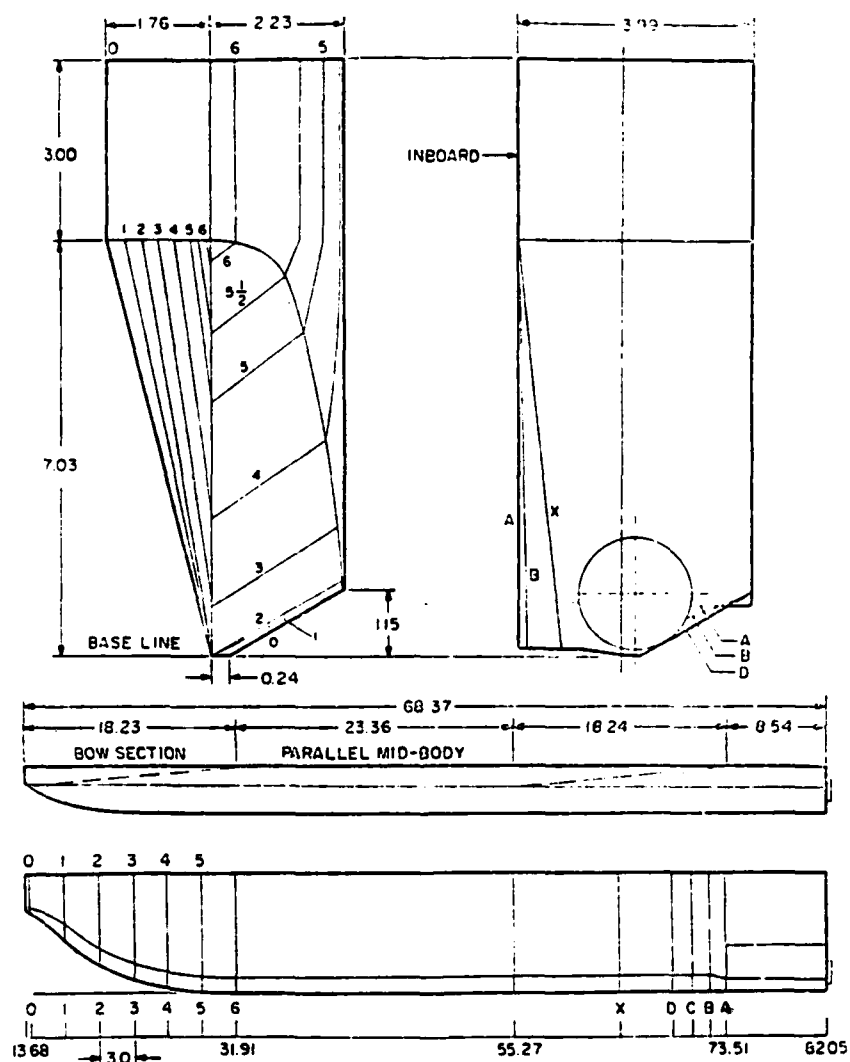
LINE PLAN OF SES-100B SIDEWALL. (SIT JUN 74)
